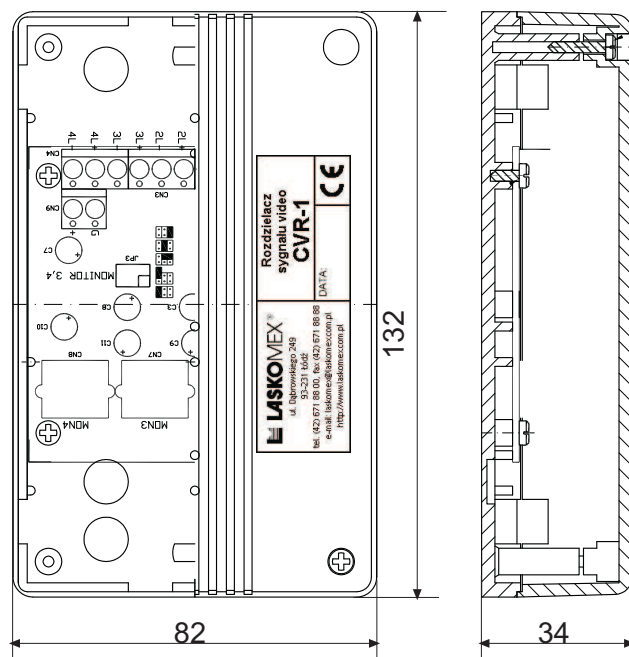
Dimensions of distributor CVR-1, CVR-2, switch CVP-2 and MRL-1 module
